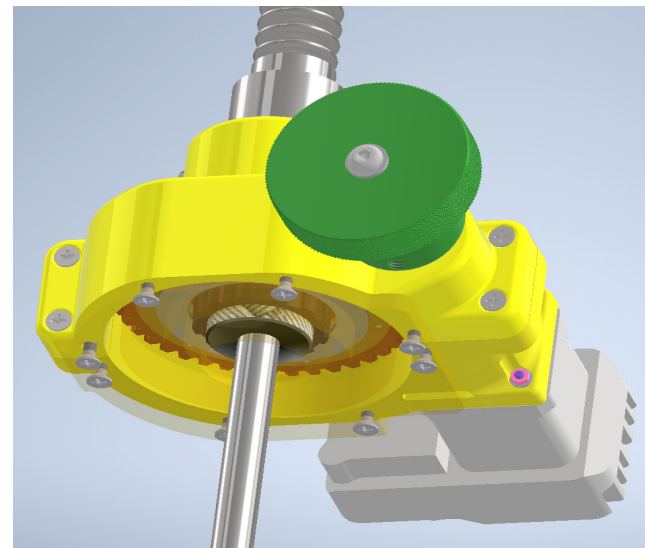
Remote Cryo Valve Adjuster (with transparent housing end plates).
